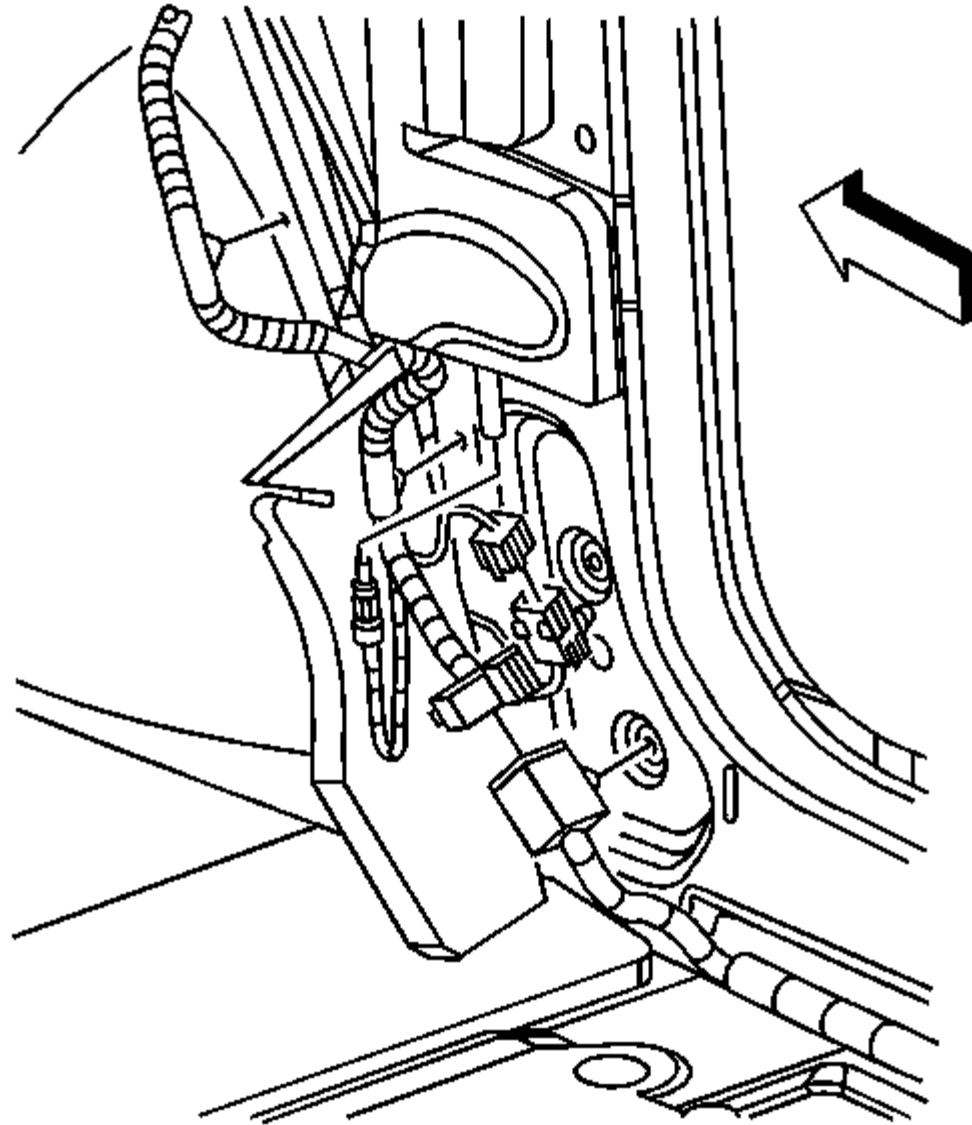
View Of Antenna Cable & I/P Wiring Harness
